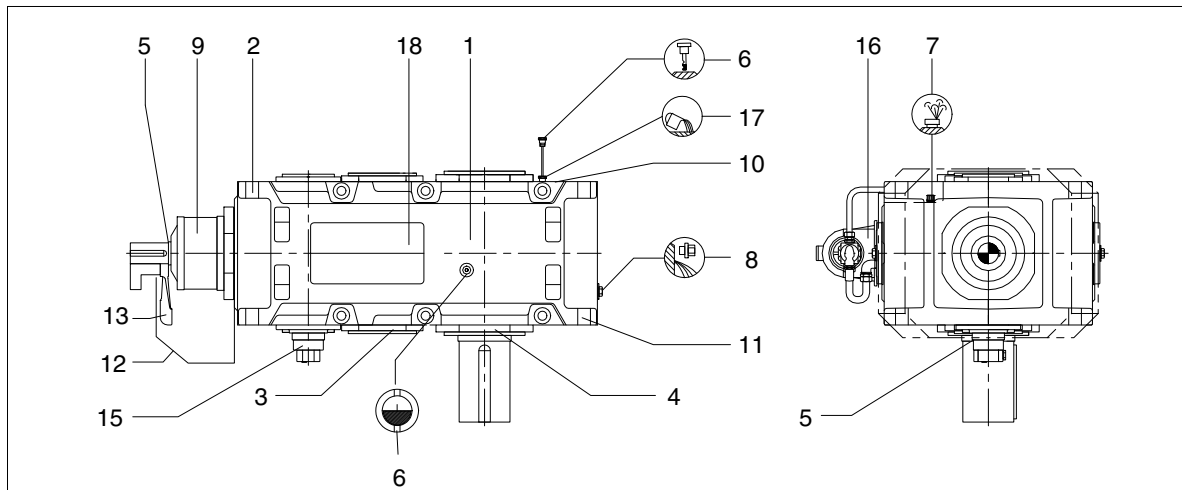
Gear-unit features on gear units type B..V with add-on oil-supply system
